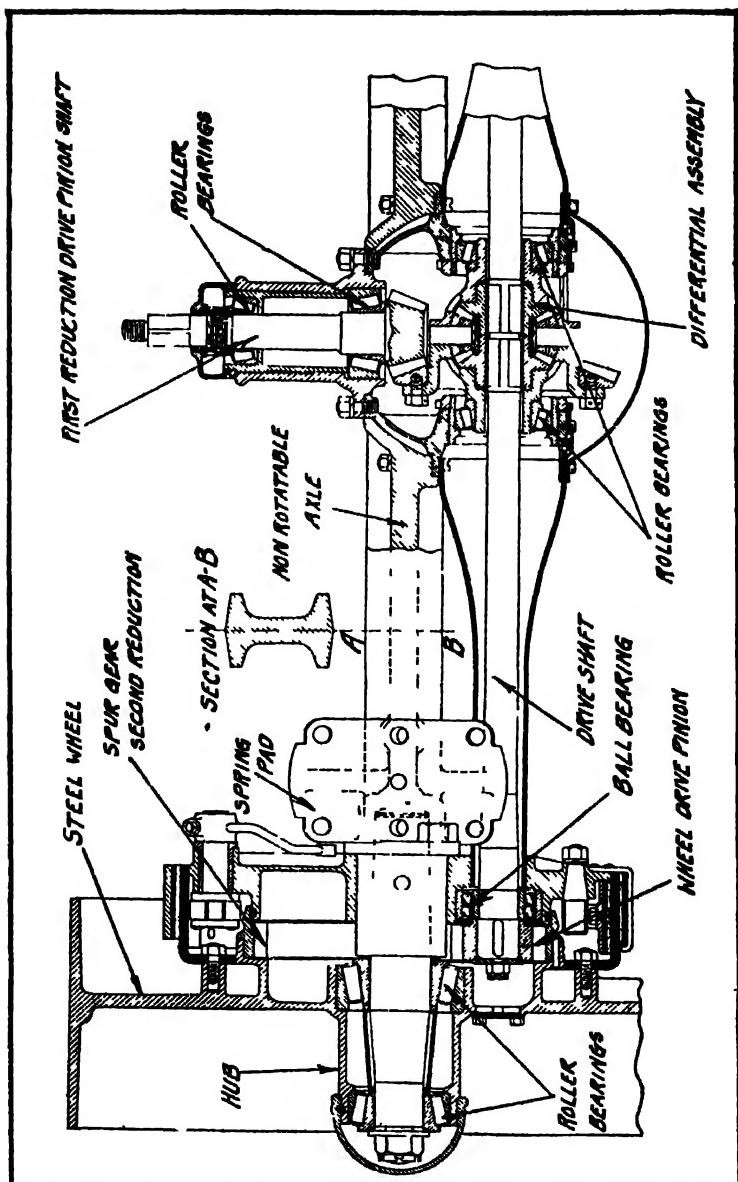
Part Sectional View Showing Construction of Internal Gear Drive Rear Axle.
